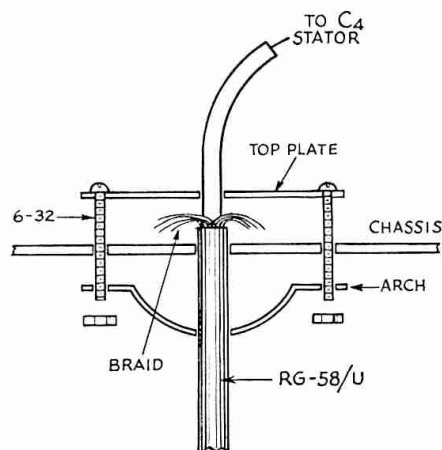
Exploded view of the cable clamp used to hold the coaxial cable running to J₂. The top plate is a 1½-inch square of sheet aluminum with holes at the four corners for 6-32 screws. The arch is a ⅜-inch wide strap that mounts diagonally under the chassis. When tightened, the top plate clamps the cable braid to the chassis; the arch lends support to the cable.
